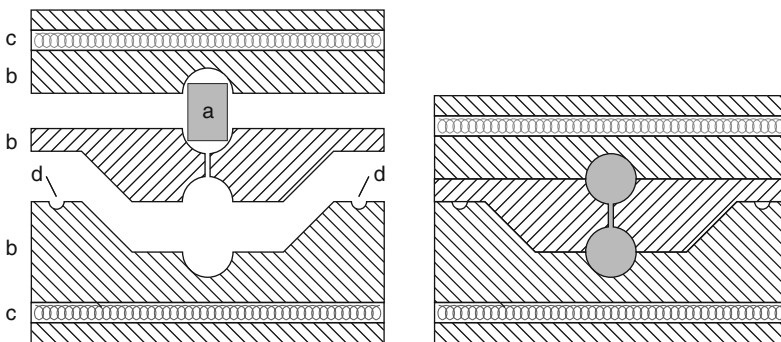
Transfer molding (according to [7]) (a) preform, (b) mold, (c) heating plates, (d) discharge groove
